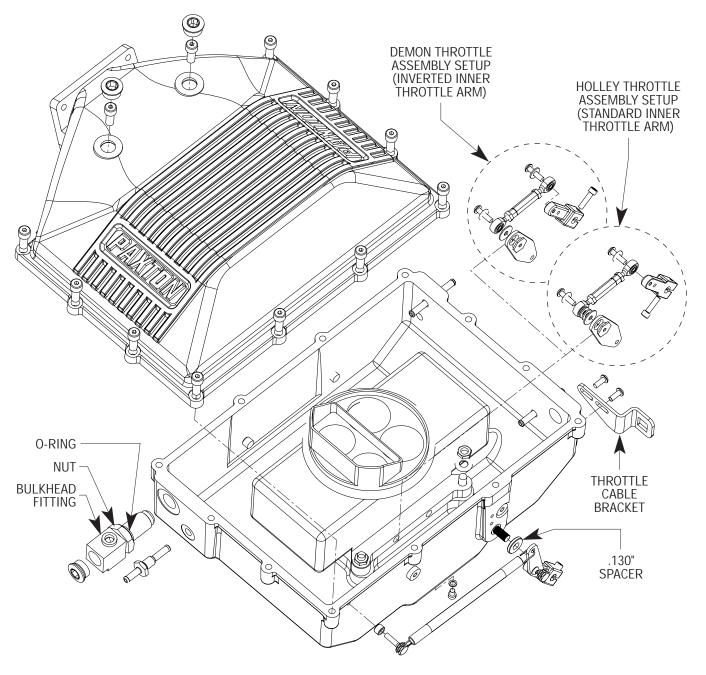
/ Carburetor enclosure (64-68 Mustang shown)
